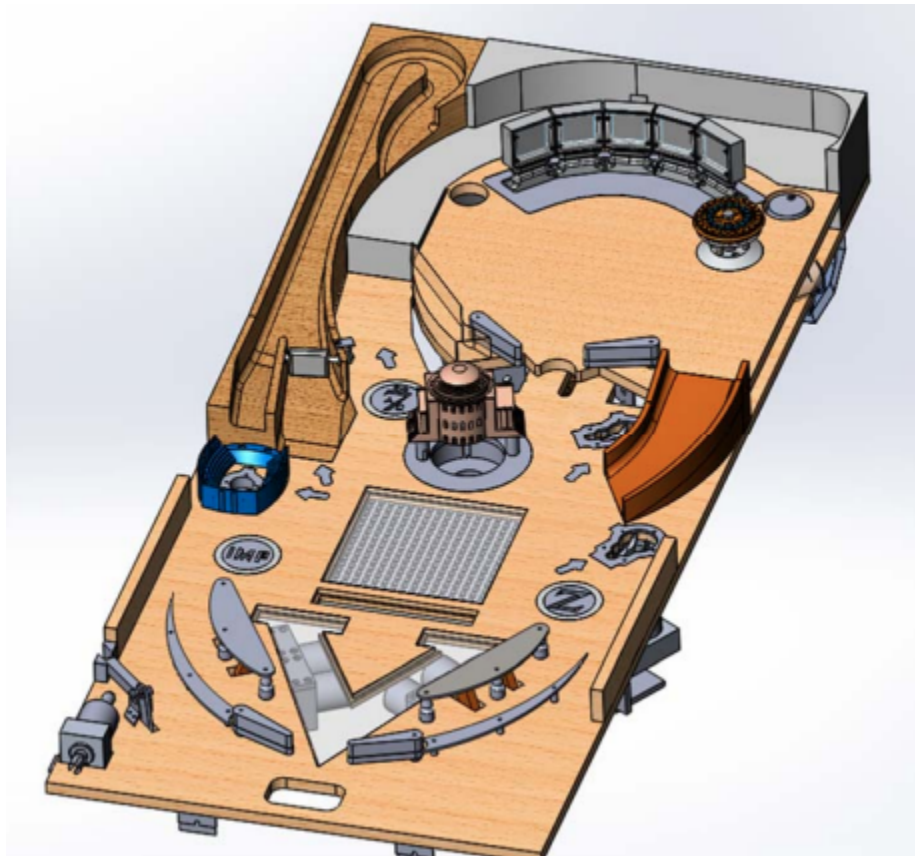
UVA MAE 2016 Pinball CAD Assembly
